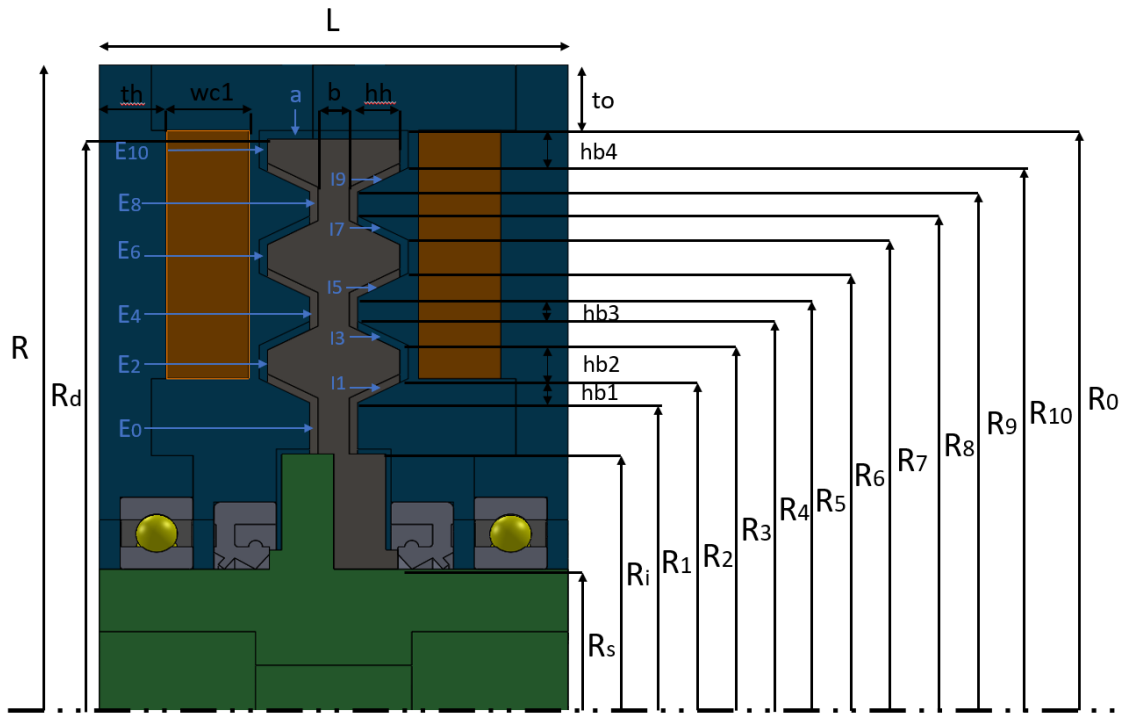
Geometric parameters of the Tooth-shaped MR Brake
